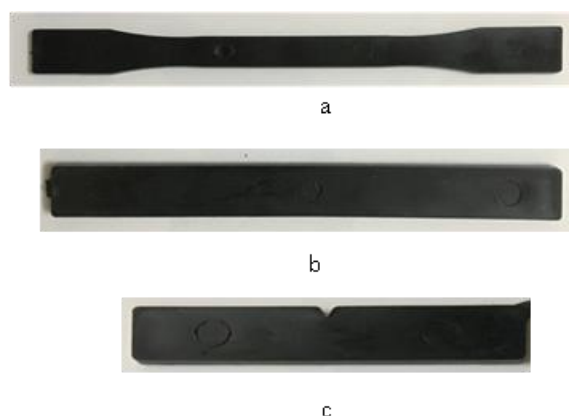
Injection molded samples for (a) tensile testing, (b) flexural and HDT testing, (c) impact tests.
